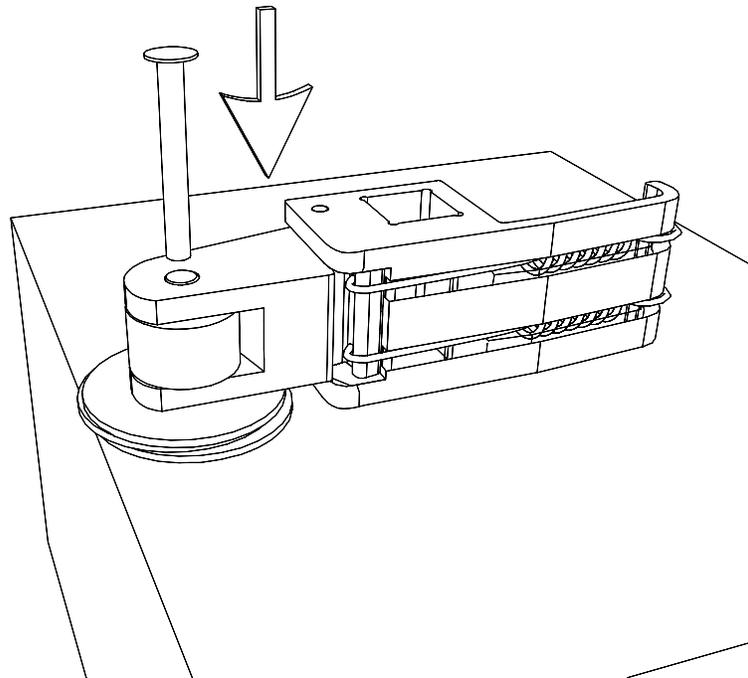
Wheel pin removal. NOTE: Be sure you remove the pin from the side shown.
